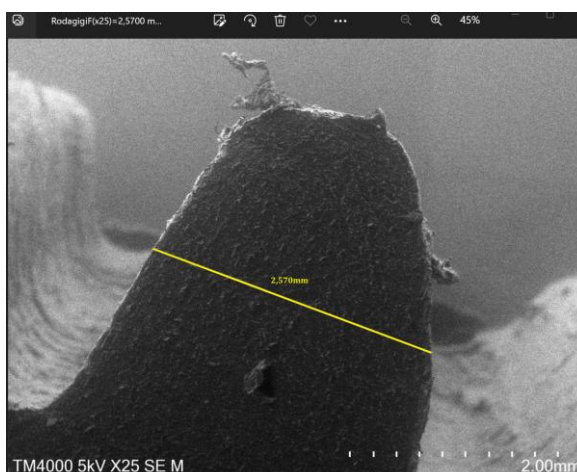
SEM photo for tooth thickness of the worm gear ring for Onyx+Carbon Fiber materials with grease lubricating conditions (F code)
